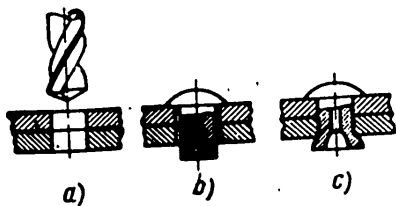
Outline of the Installation of Special Explosive Rivets
